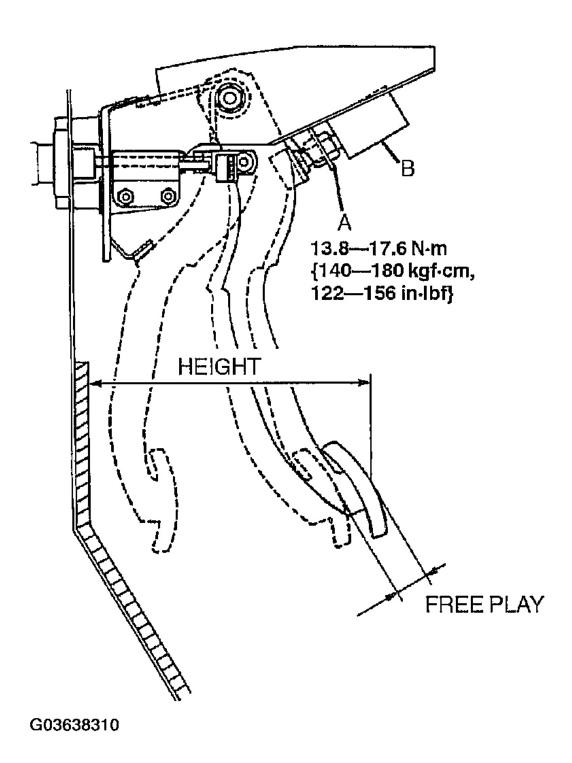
Inspecting Clutch Pedal Height & Free Play Courtesy of MAZDA MOTORS CORP.
